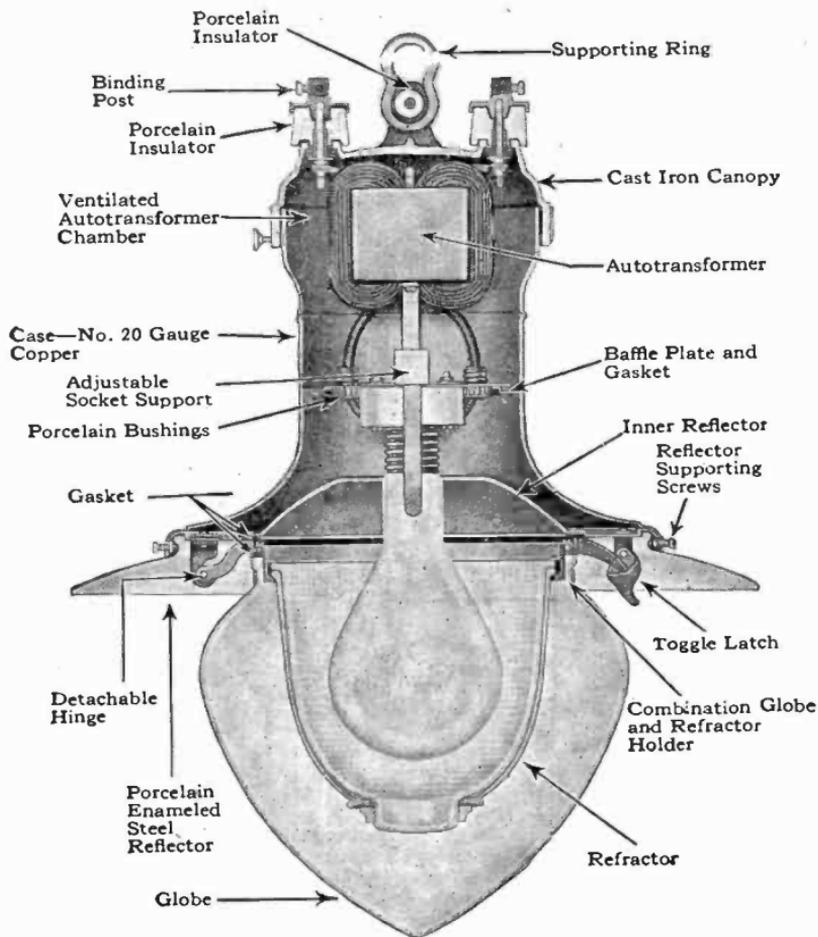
,328 and 8,329.—Westinghouse dust proof Luxsolite pendant; sectional view showing parts.
